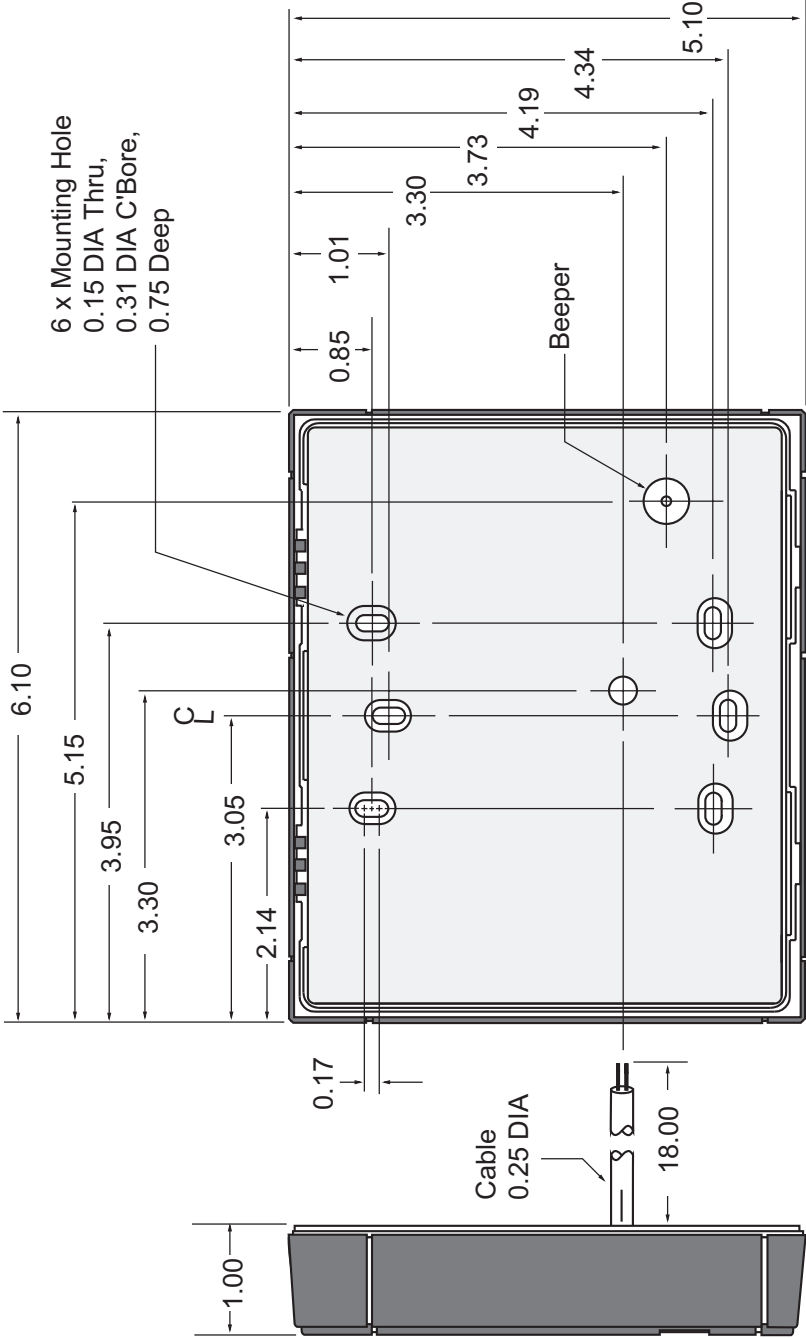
FlexPass Serial Mid-Range Reader Mechanical Dimensions
